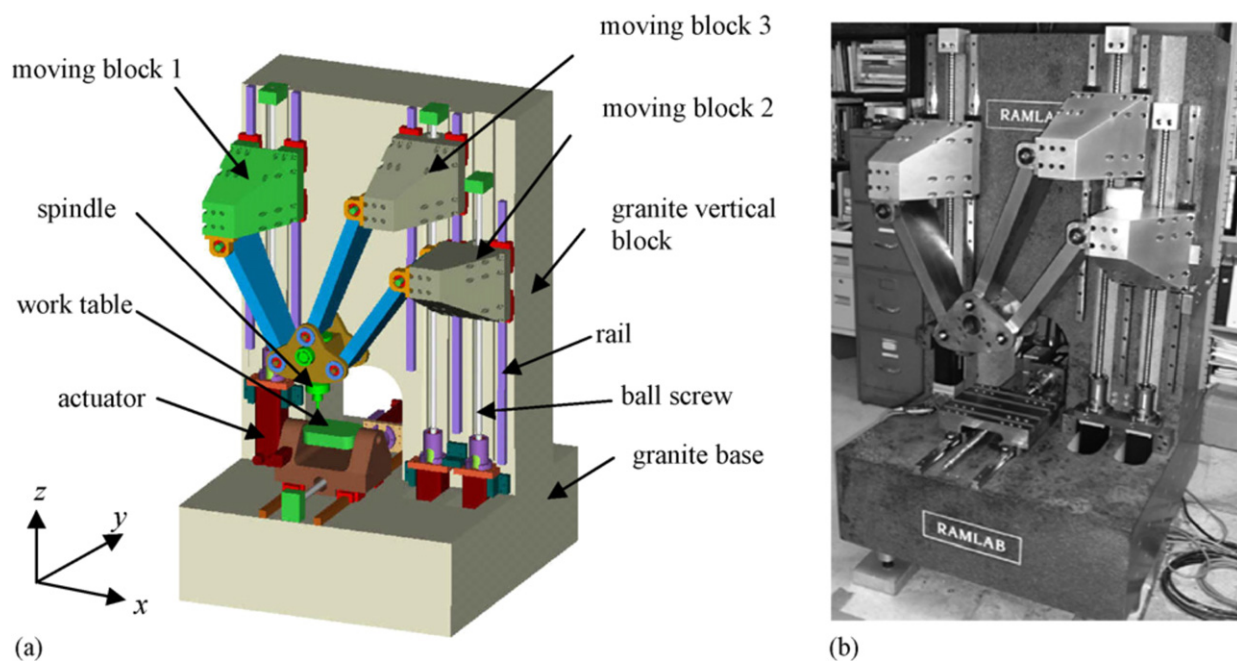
The MIT-SS-1, PRR type hybrid CNC milling machine. (a) Solid model of the MIT-SS-1. (b) Prototype. Reproduced from Son, S., Kim, T., Sarma, S.E., Slocum, A., 2009. A hybrid 5-axis CNC milling machine. *Precision Engineering* 33 (4), 430–446.
